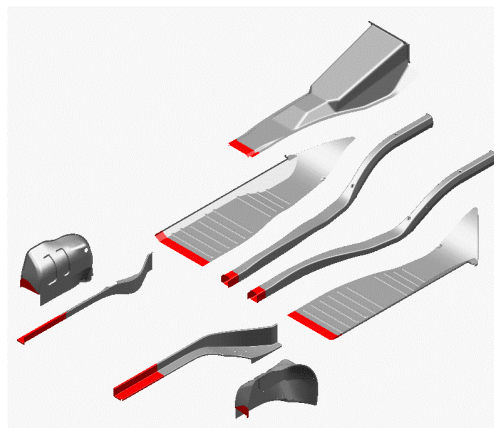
C-Class/PNGV-Class Common Parts Exploded View
